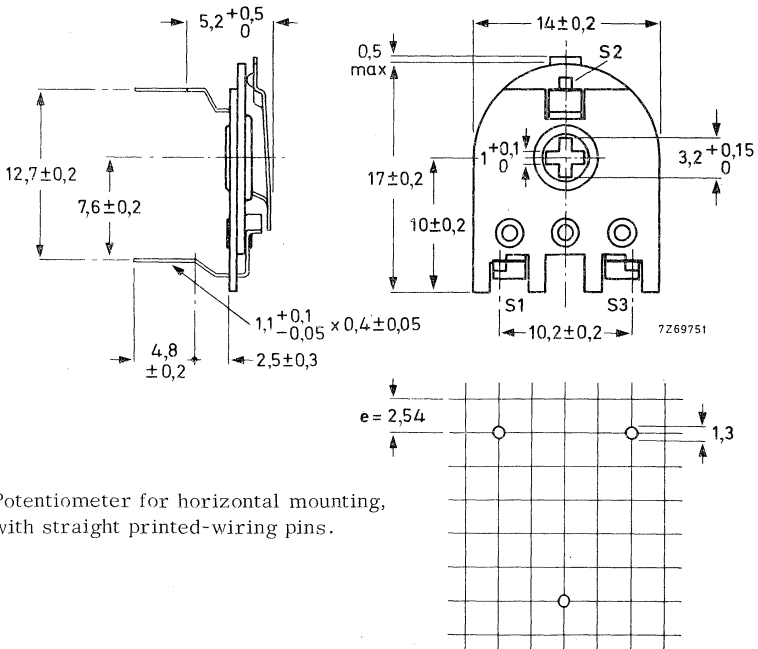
Potentiometer for horizontal mounting, with straight printed-wiring pins.
